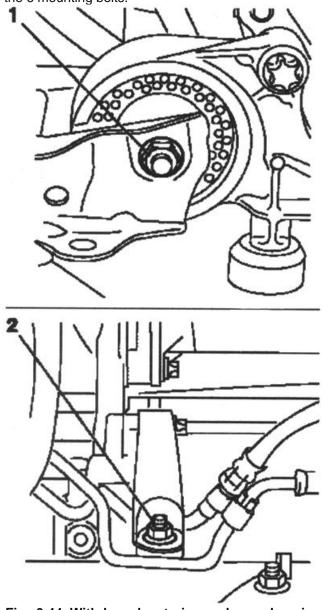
Withdrawal anterior and rear damping blocks Engine:
